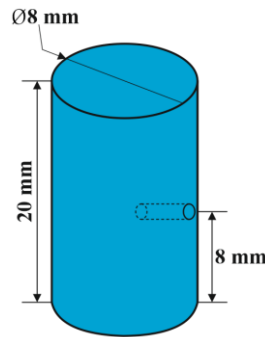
Sample dimensions of abrasive pin-on-plate test system
